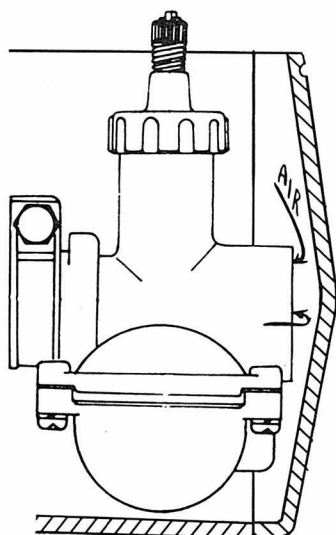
It may be necessary to modify carburetor cover or space cover out to prevent restriction of air to carburetor.
